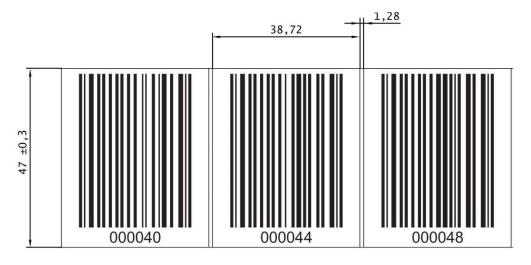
Dimension drawing barcode tape BCB G40 with 40 mm grid (all dimensions in mm)
